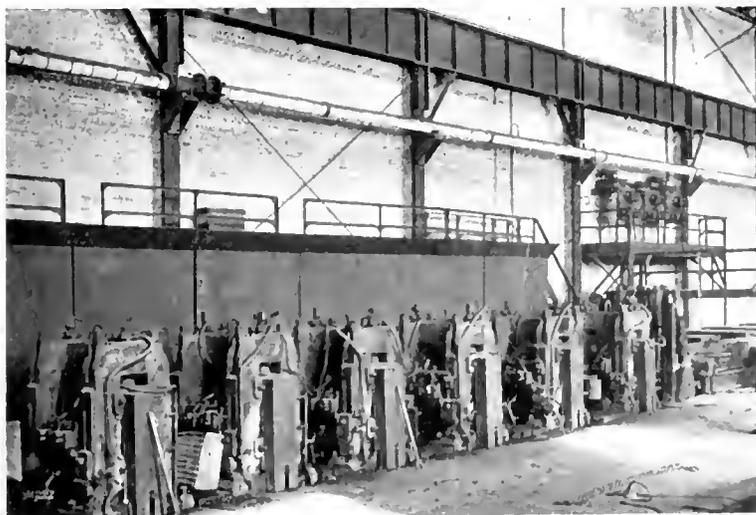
18 in. Blooming Mill Operated by 6000 H P Induction Motor
